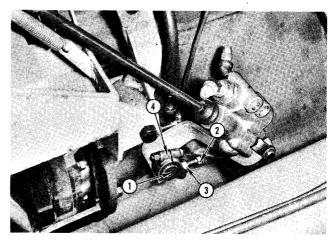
CLUTCH PEDAL FREE PLAY ADJUSTMENT 1. Cross Shaft 3. Jam Nut Adjusting Lever 2. Setscrew 4.
